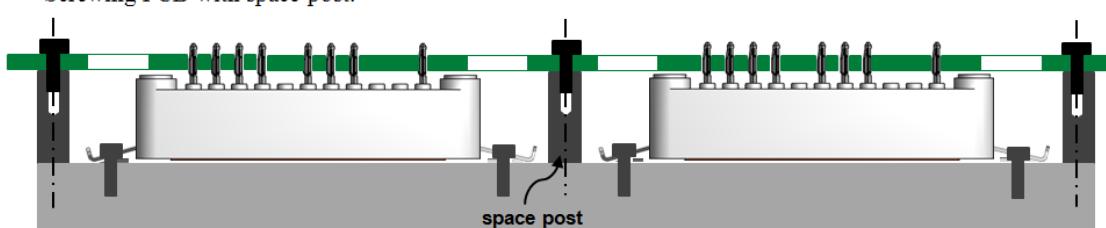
Example of Whole Assembly Process for PCB and Heatsink with Space Posts
